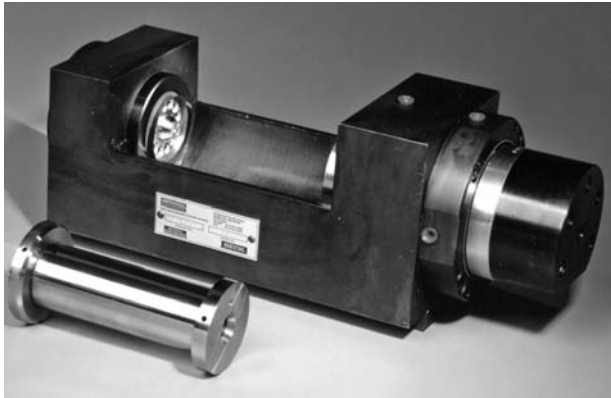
DFW-HHD heavy-duty plunge hydraulic dresser spindle.
